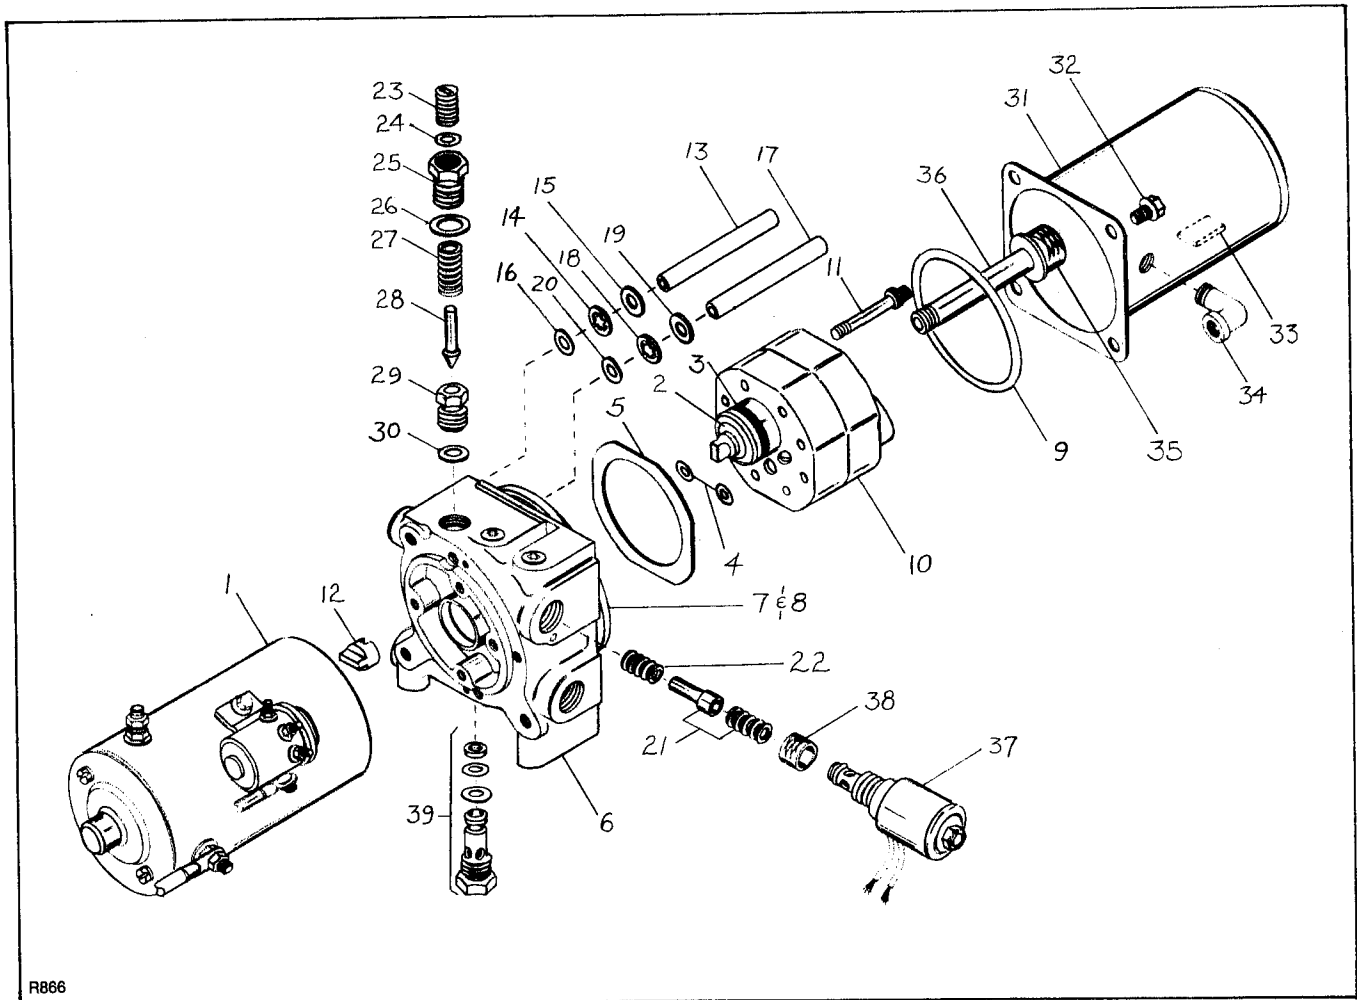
Pump-Motor-Reservoir Assembly. (Serial Numbers 81937 and Higher)
